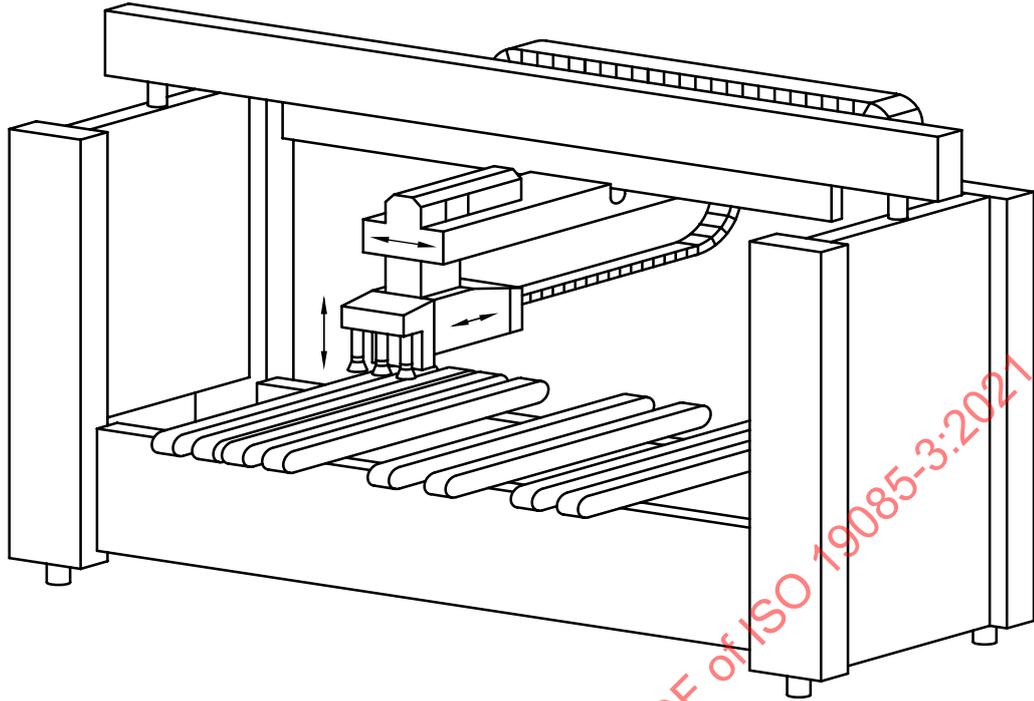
Example of portal frame machine with fixed portal, feeding belts, moving machining head
